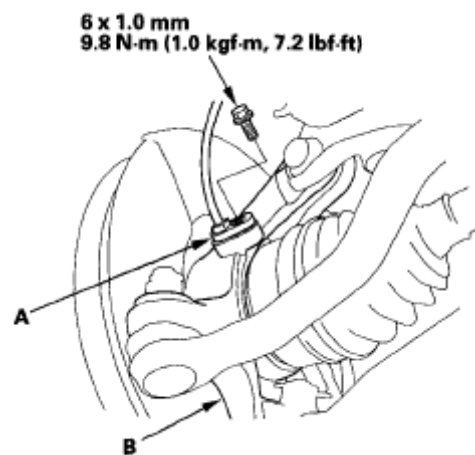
Identifying Wheel Sensor And Knuckle (With Torque Specifications)
